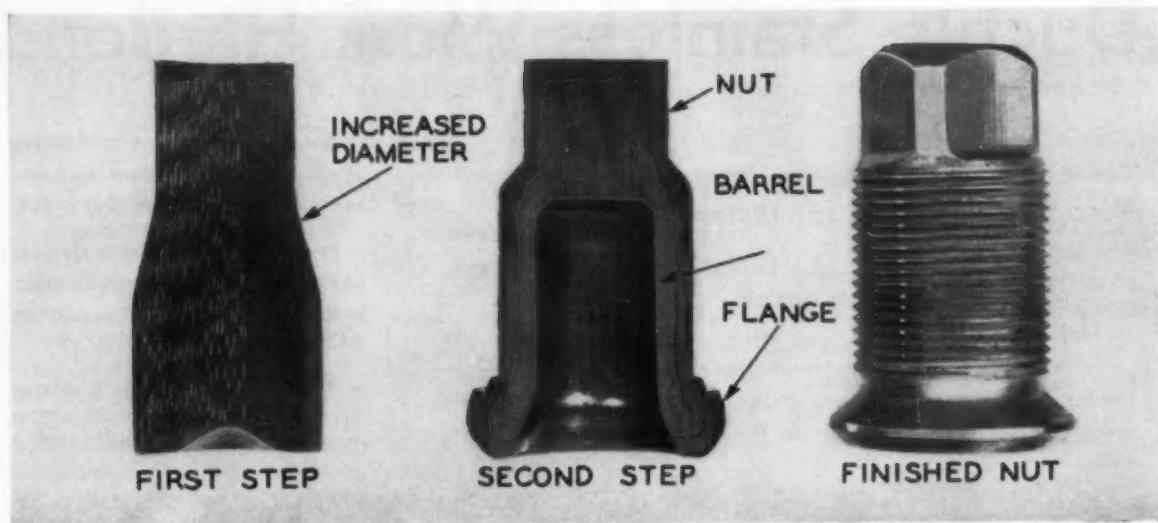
Truck wheel nut—another high-production item—is cold-formed in a two-step extrusion process at Ford.
